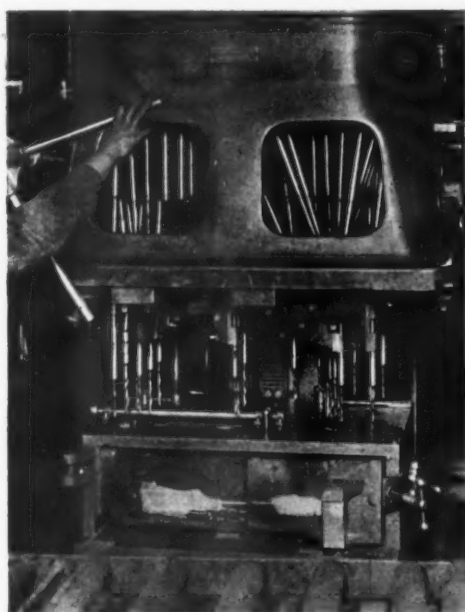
Left—Drilling holes in the top of the crankcase casting. This machine also reams two holes which act as locating points
